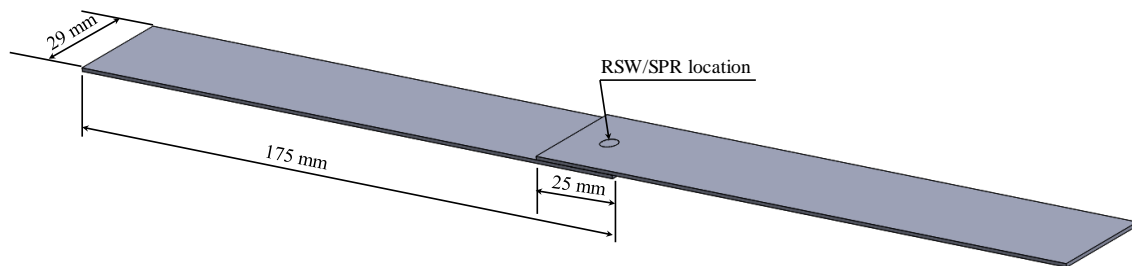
SPR and RSW lap configuration samples with rivet or weld nugget at the centre of the overlap region.
